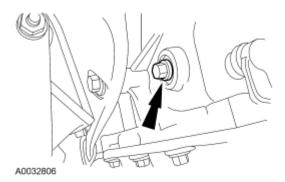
Locating Engine Plug Bolt Courtesy of FORD MOTOR CO.
